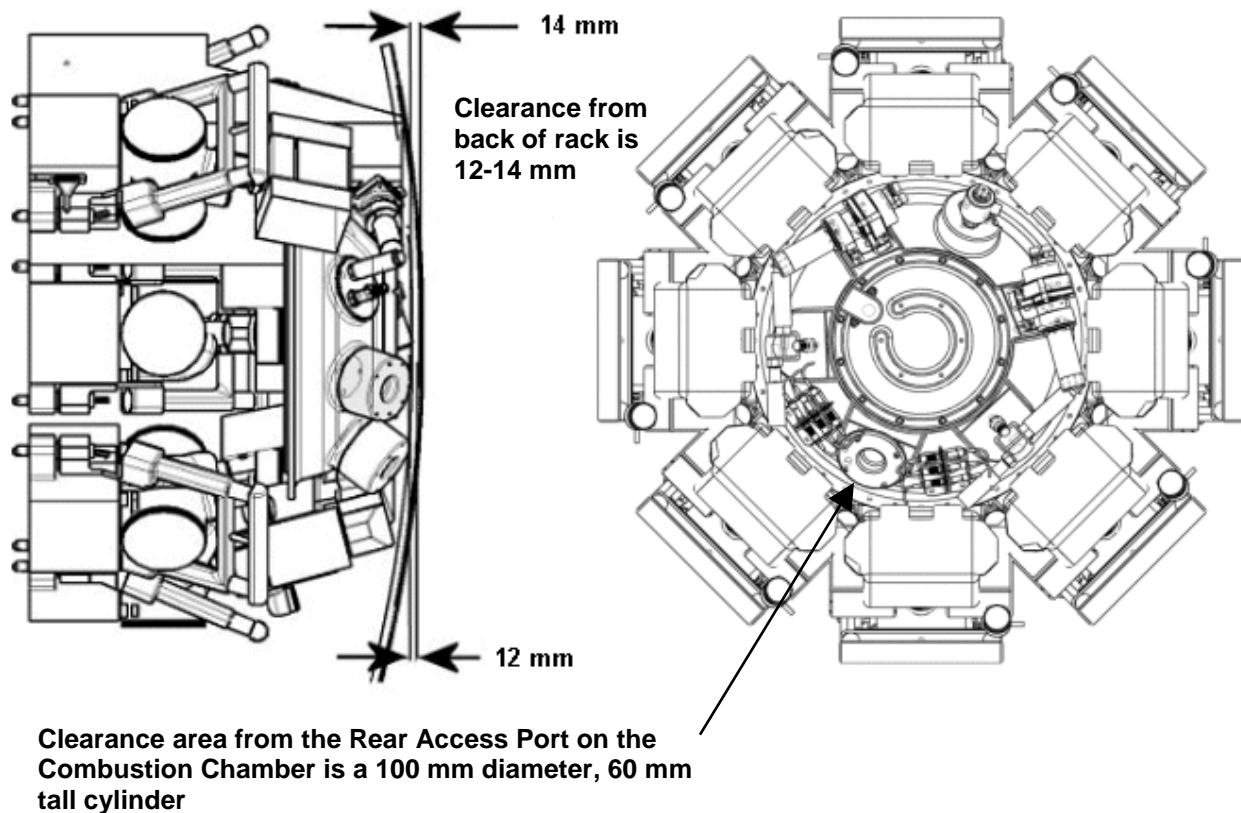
REAR ACCESS PORT INTERFACE DETAILS
